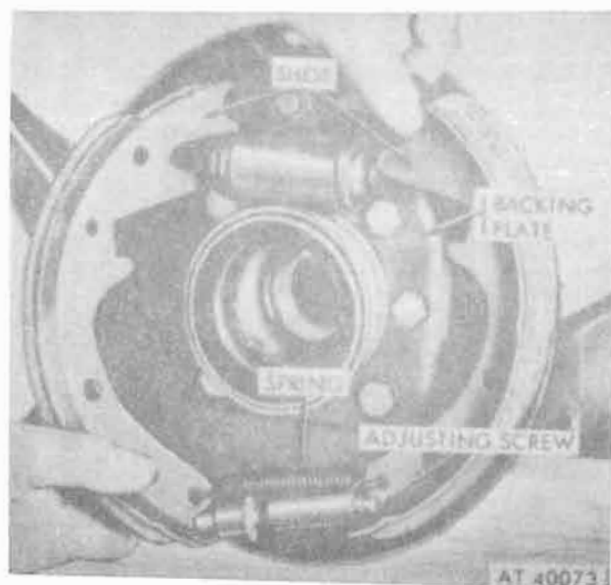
Brakeshoes and adjusting screw and spring assembly.
